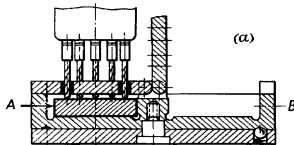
SWIVEL JIG—5-SPINDLE HEAD
